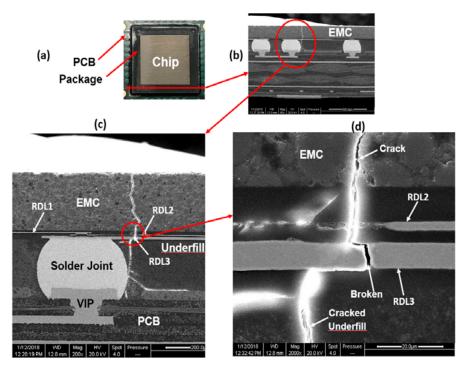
Failure modes of the fan-out lead-free package PCB assembly subjected to a drop test (>500 drops): a) The fan-out package PCB assembly; b) Cross section of the assembly; c) and d) Close-up of a cracked RDL; a cracked EMC; and a cracked underfill (but no crack in the solder joint).
